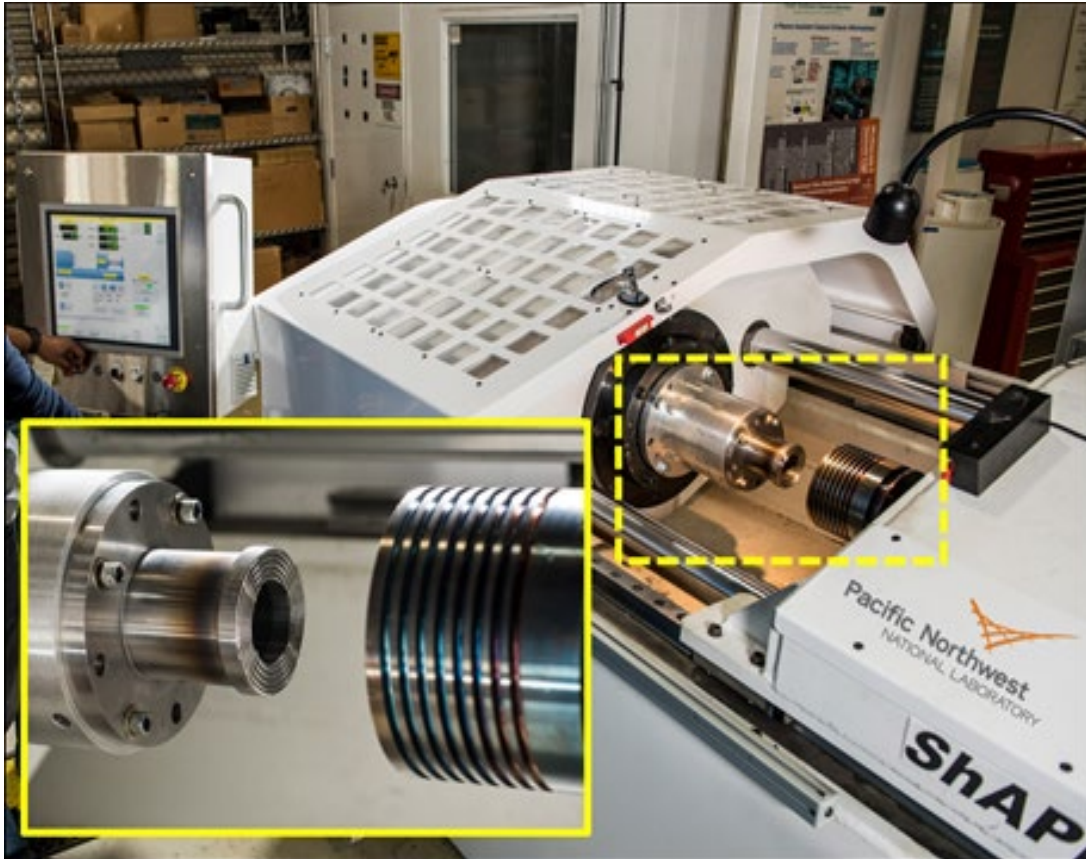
C.2. Shear-Assisted Extrusion machine. Source: PNNL.
